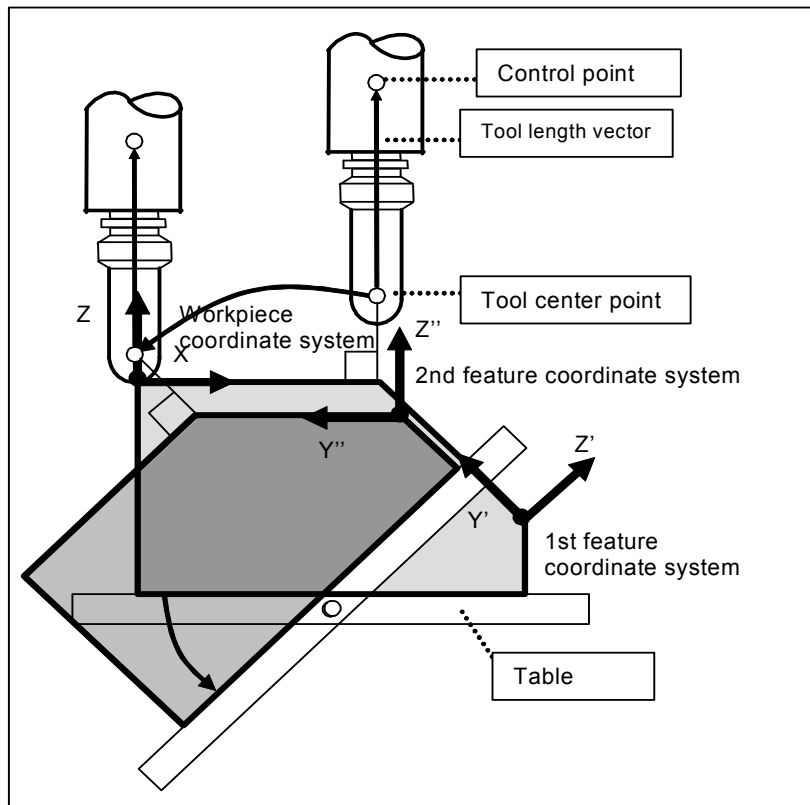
(b) Operation of tool center point retention type tool axis direction control (table rotation type)
